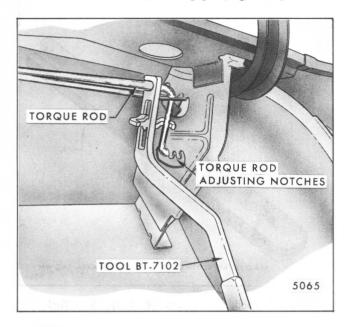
Rear Compartment Torque Rod Adjustment -Oldsmobile "E" Styles
